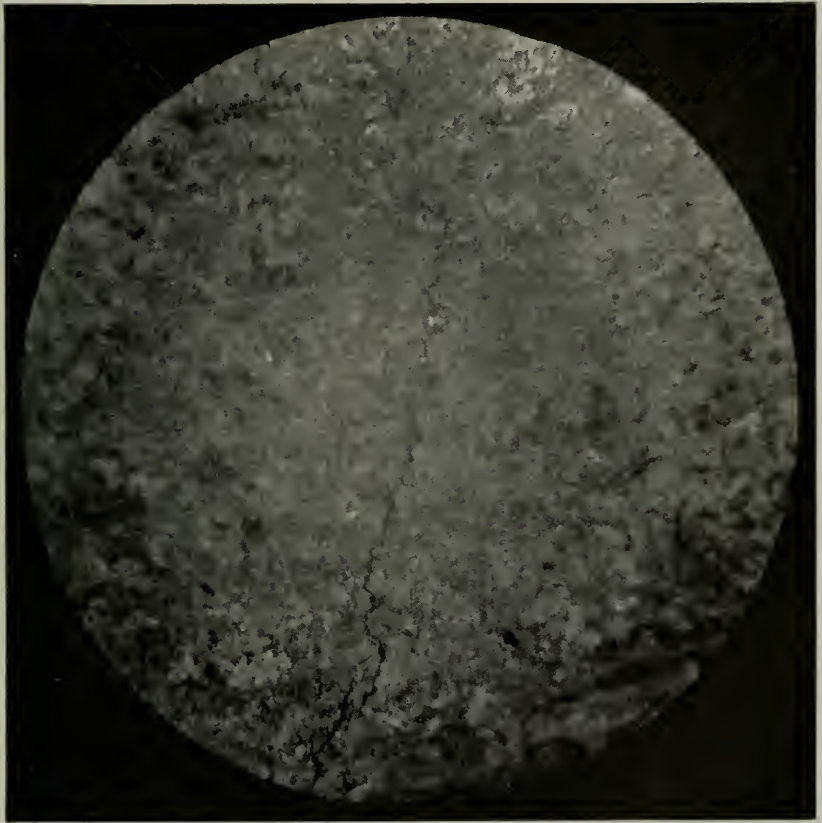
An embrittlement defect at about 100 magnifications. This is what the eye sees when using the regular Hartford Steam Boiler magniscope on a highly polished wall surface of a rivet hole.
